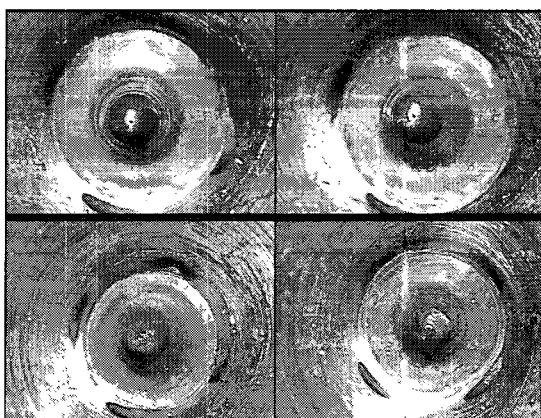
Oxidizer Post of Injector D after 4.5 sec, 10 sec Combustion Tests
